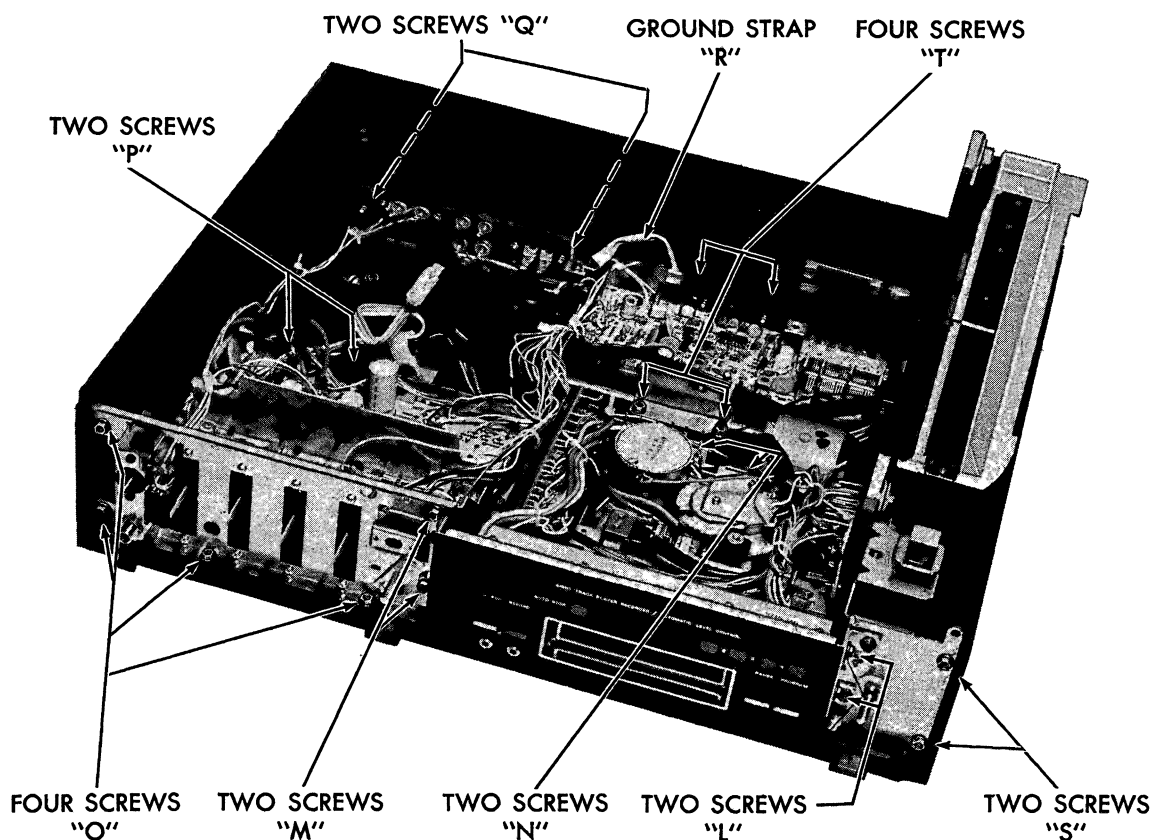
CHASSIS AND TAPE UNIT MOUNTING SCREWS
